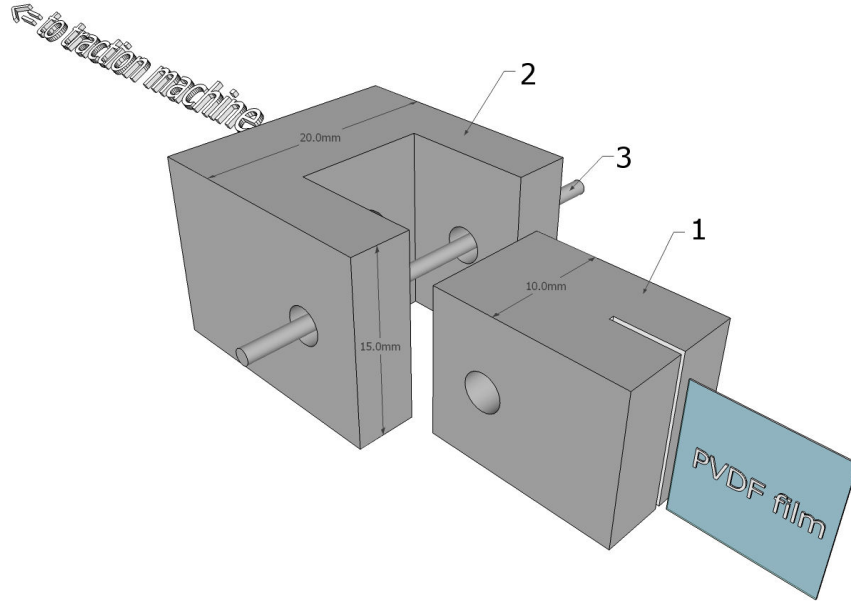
Schematic drawing of the clamps used for PVDF thin film traction tests. The PVDF film is glued inside part 1, which is then fixed inside part 2 by means of a pin 3. Part 2 is directly screwed to a traction machine.
